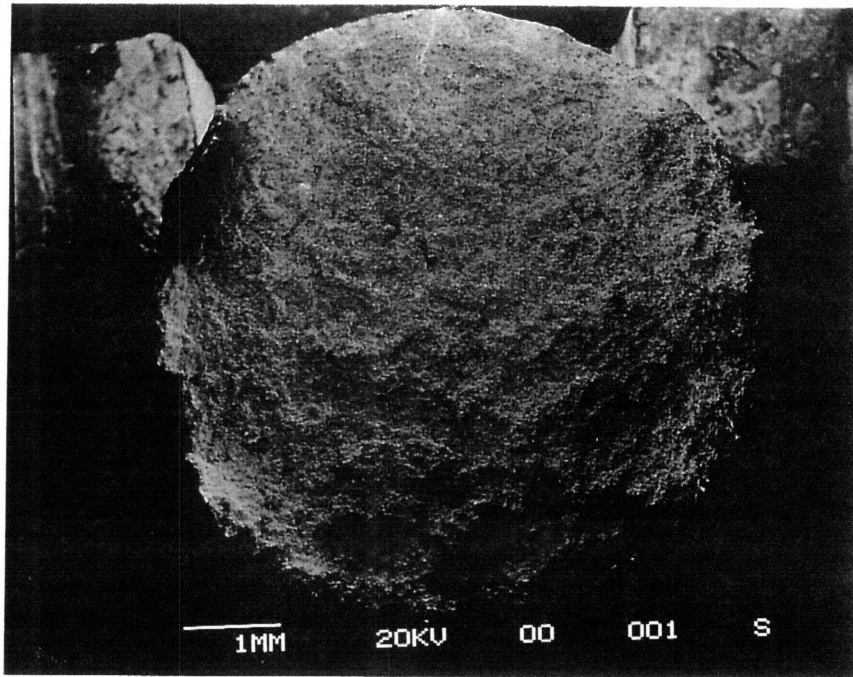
Fracture surface of the Ni-20Cr powder interlayer.
